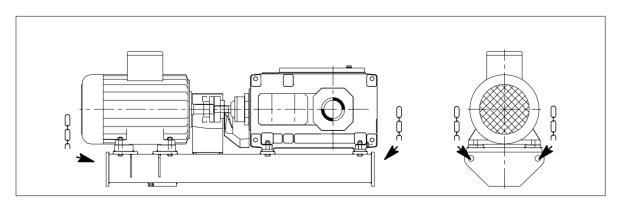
Attachment points on gear units types B... with gear-unit swing base
